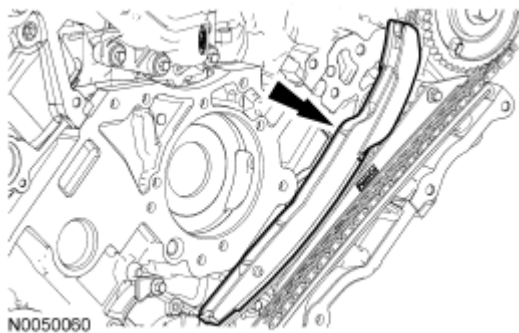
Locating LH Primary Timing Chain Tensioner Arm
